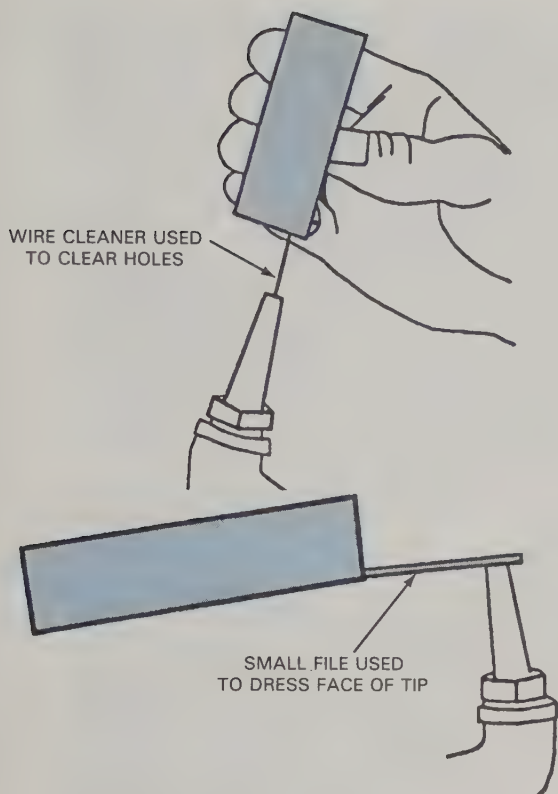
A tip cleaner should be used to clear and clean holes in the cutting tip. Several sizes of tip cleaner may be needed.
